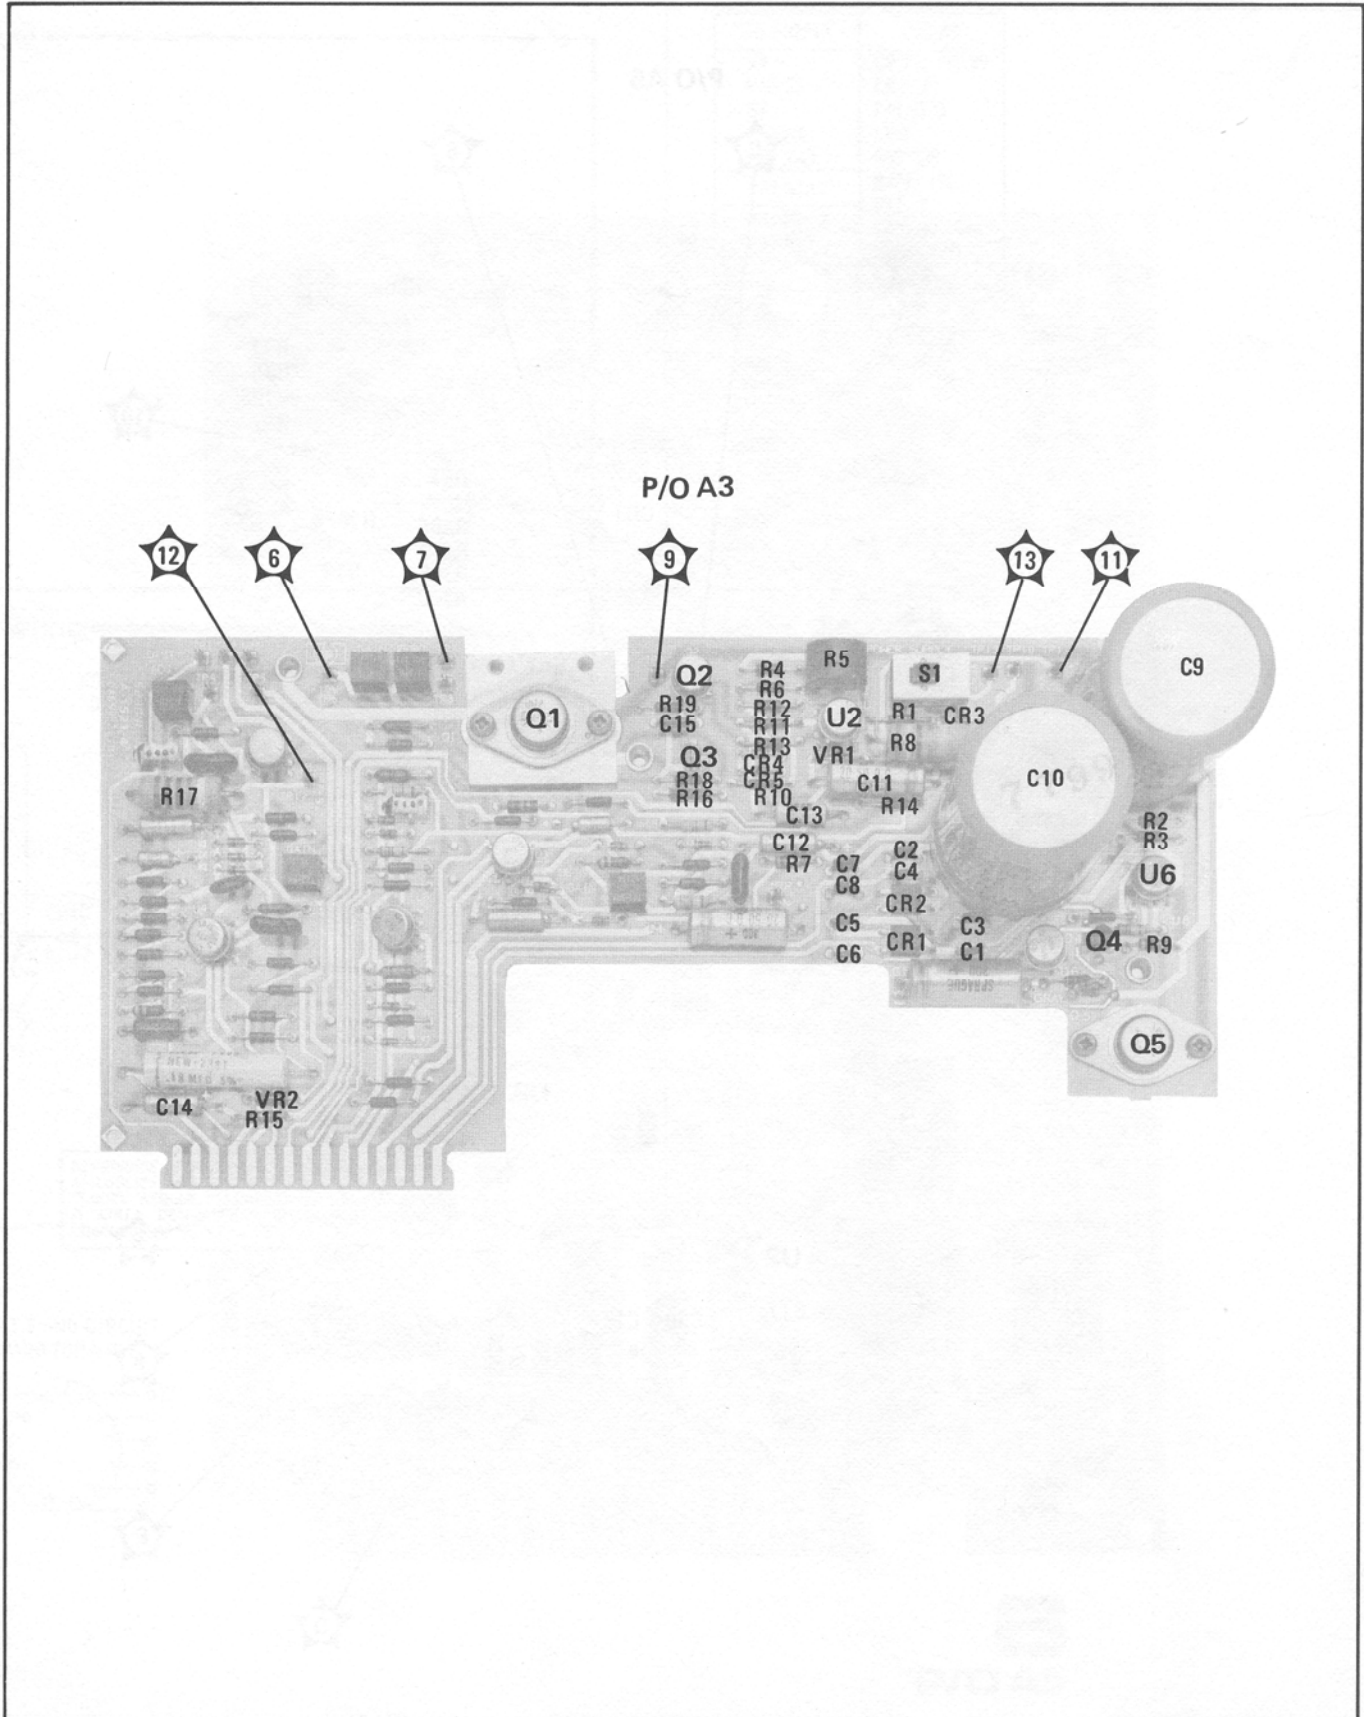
P/O A3 Control/Power Supply Board Assembly Component Locations
